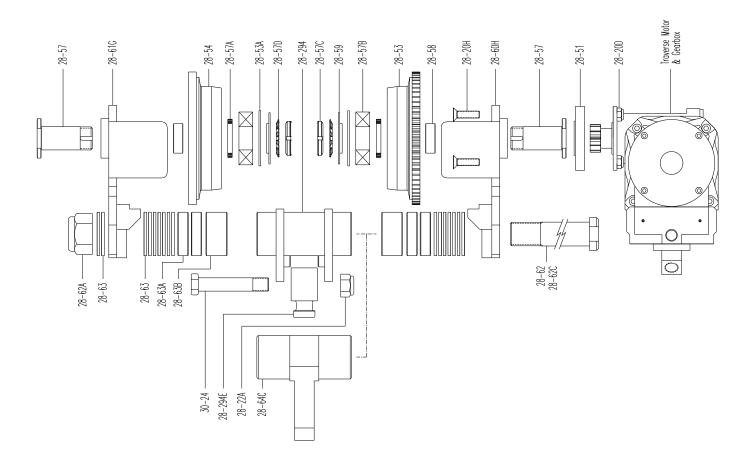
Components of 6T Trolley with Traverse Motor & Gearbox
